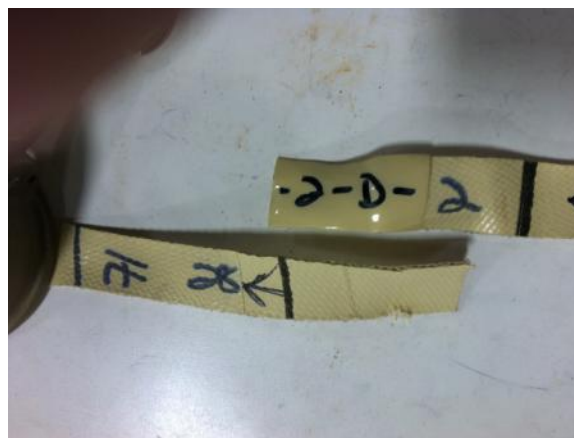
Torn Outside of Weld (TOW) sample
